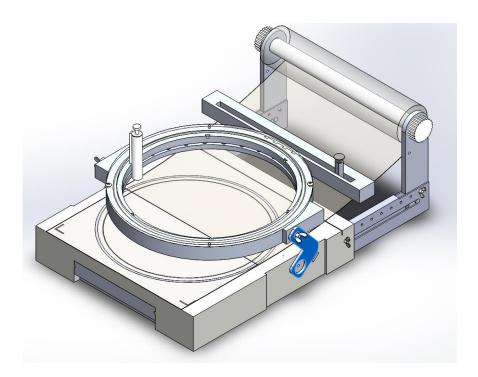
Cutting Track Lifts Up and Set Mylar Sheet To Right Location
